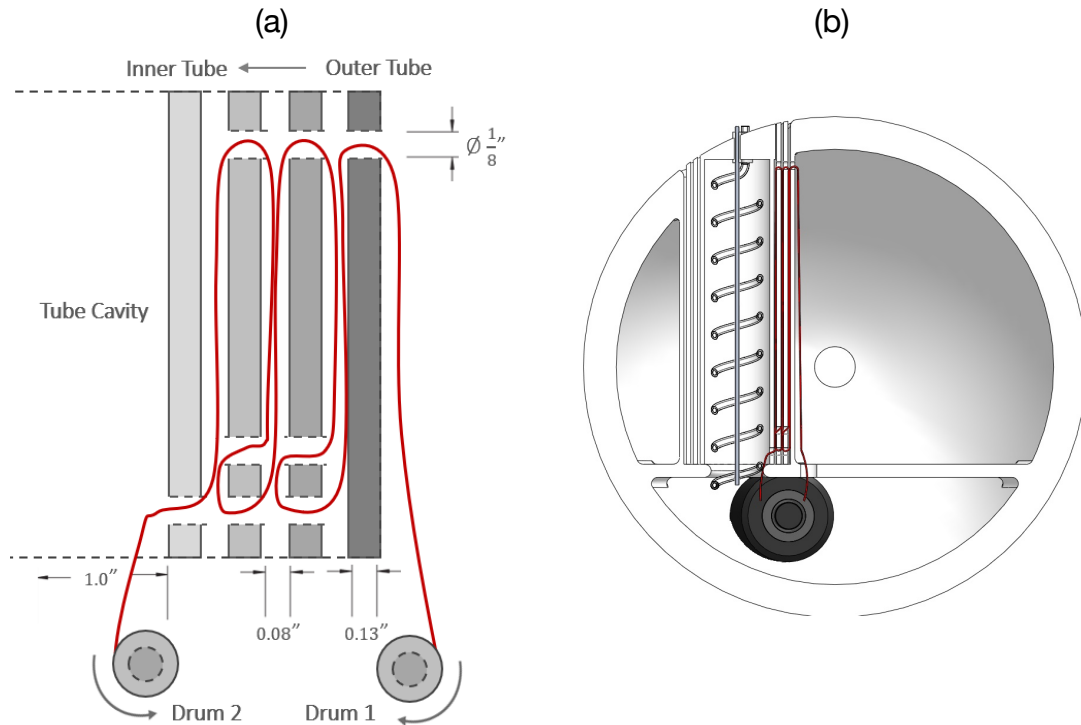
Pulley threading schematic. (a) Detailed cross-section of the pulley threading schematic with dimensions and (b) CAD cross-section of the pulley threading schematic where the red line is the pulley. The pulley is threaded through holes within each tube and then tethered to drums affixed to the motor. The pulley is tethered to each drum in opposite directions such that when the motor runs in the forward bias, the tubes actuate up and when the motor runs in the reverse bias, the tubes actuate down.
